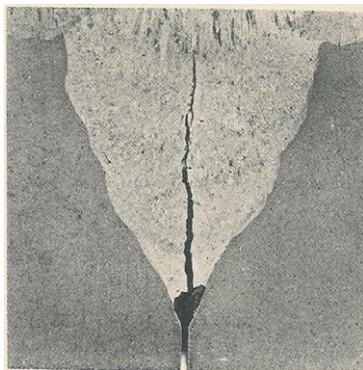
CRACK IN MARTENSITIC STEEL WELD
